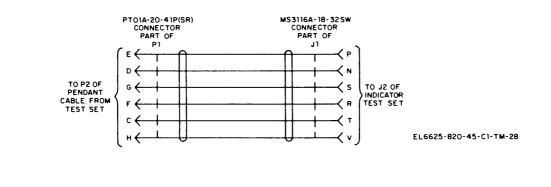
Fabricated cable to indicator test set, construction details.
